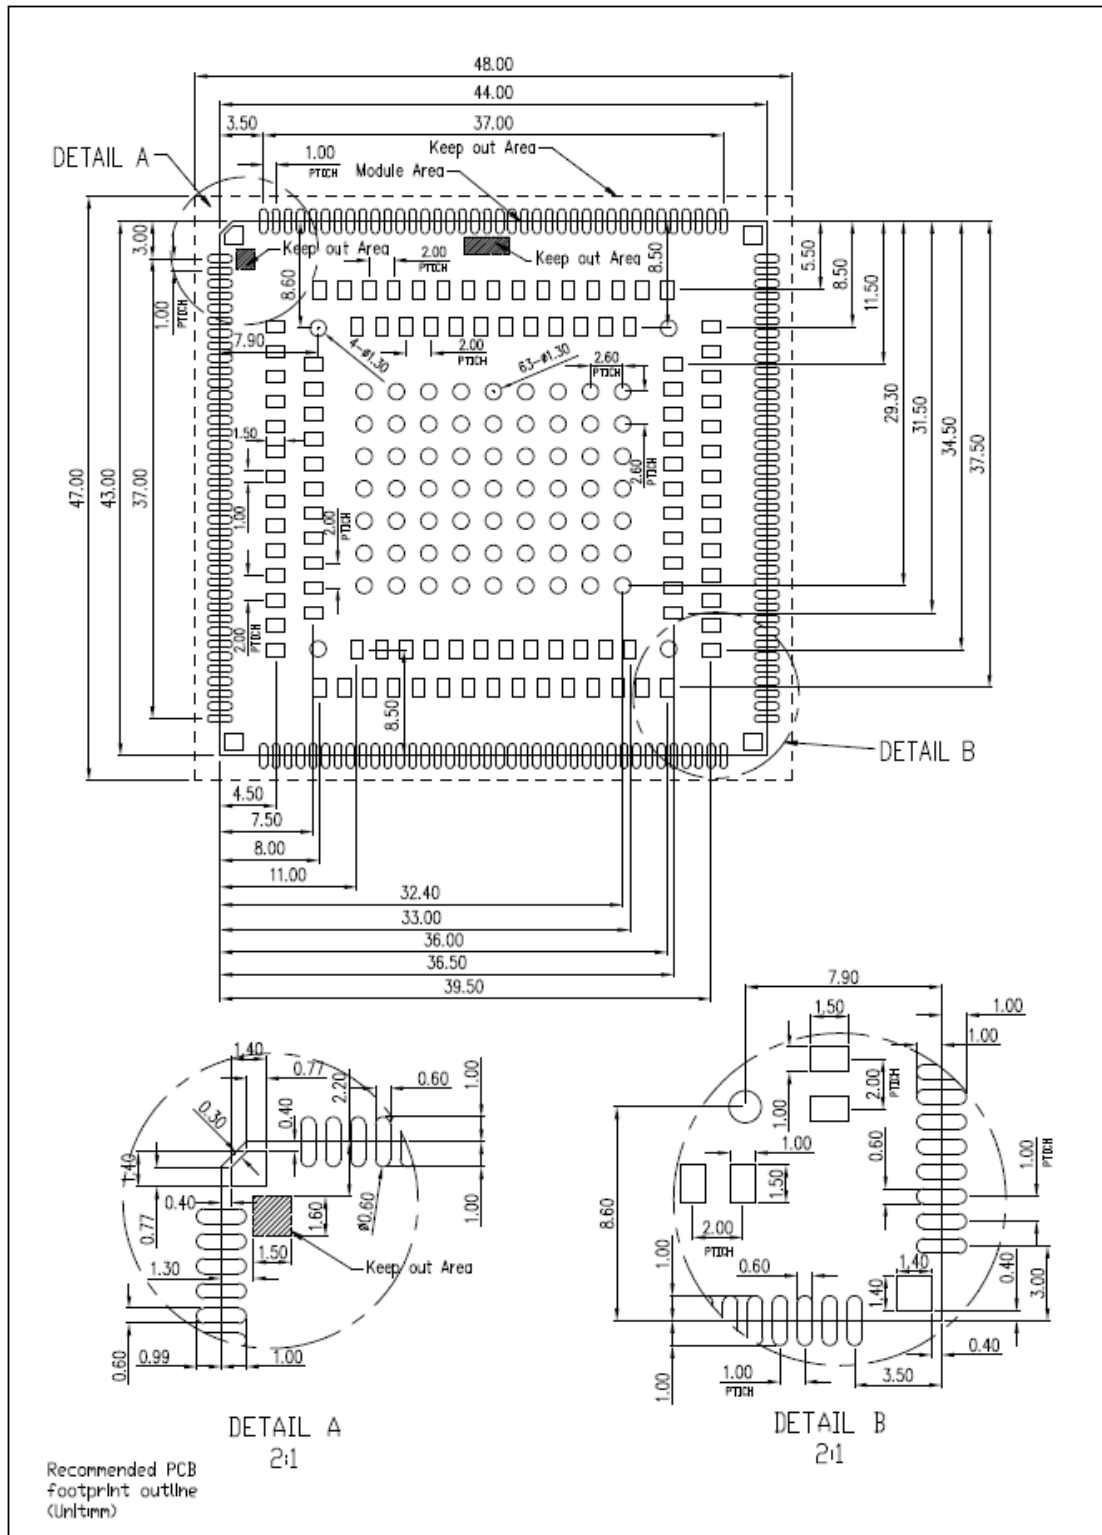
Recommend Physical Outline Drawing (Unit: mm)
